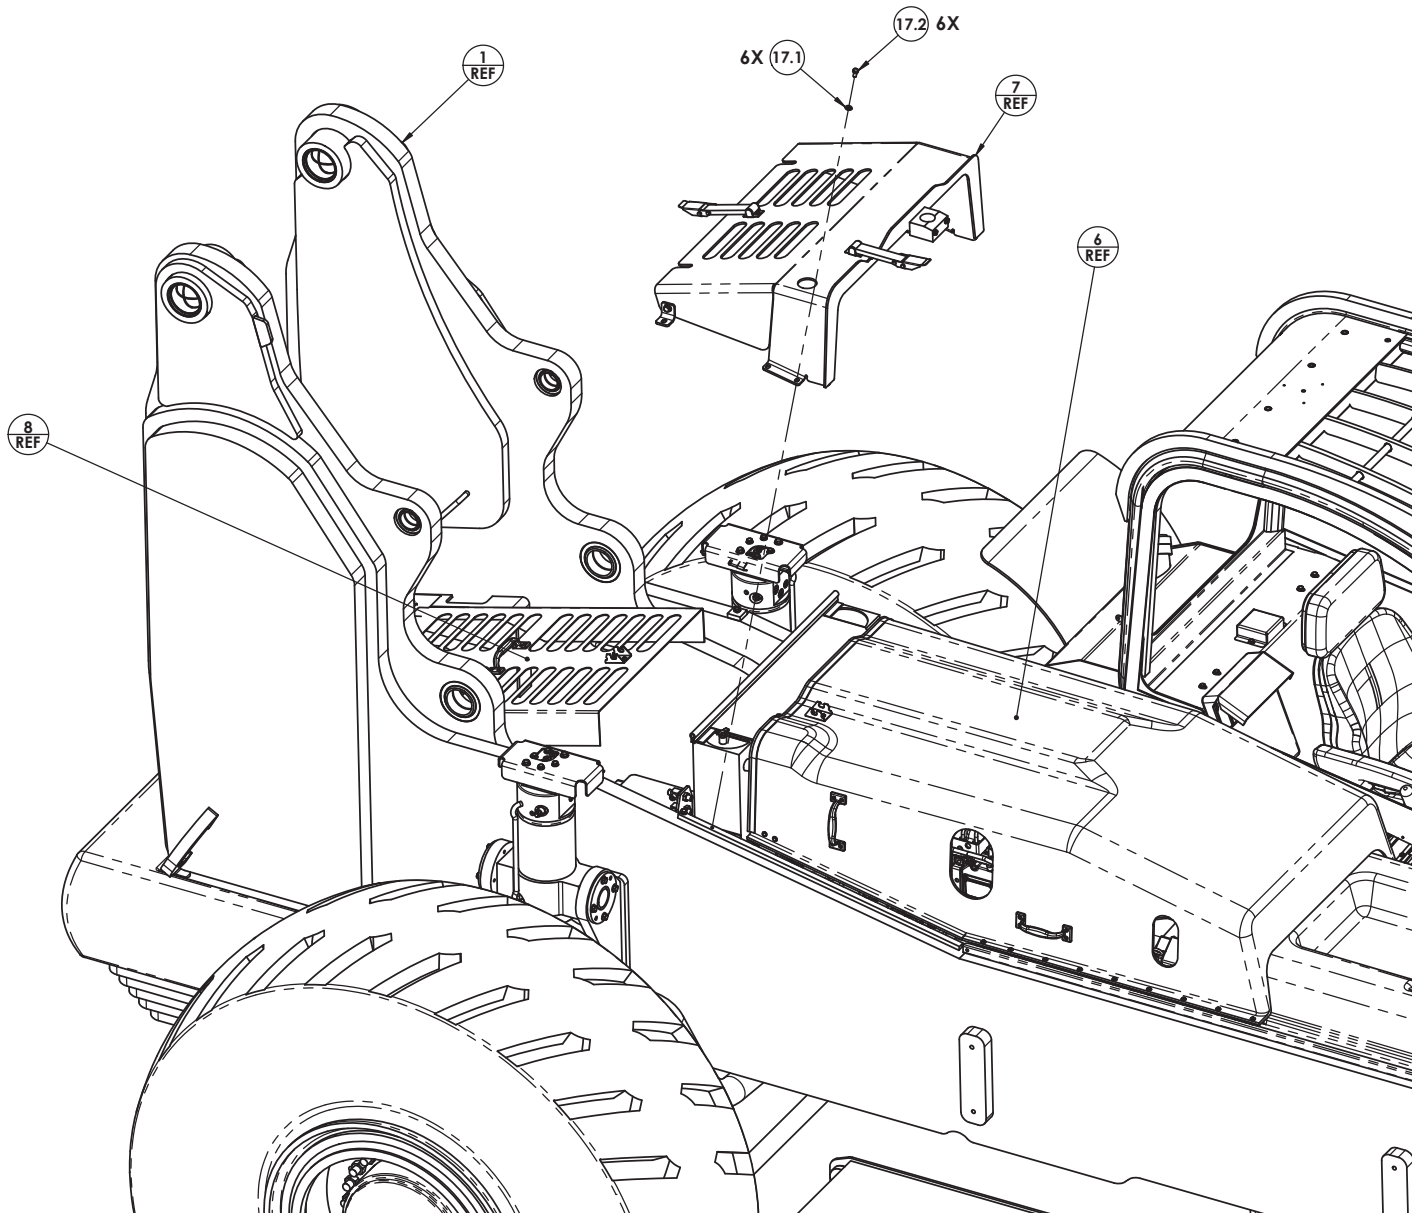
CHASSIS ASSEMBLY - CAB & COVERS (32002-000)
